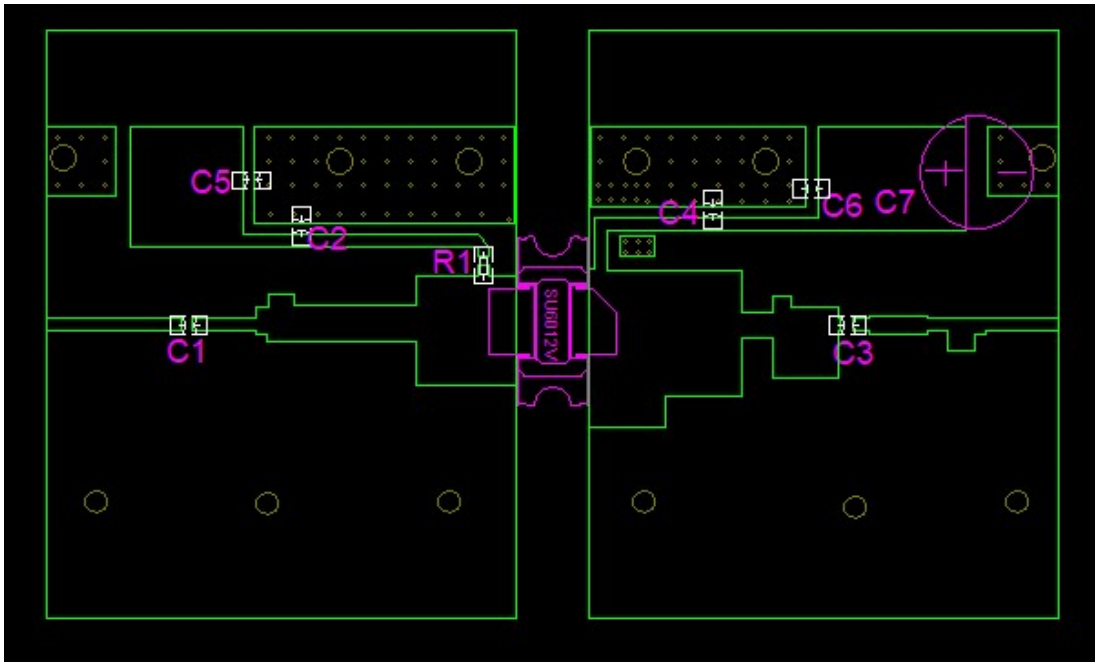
Test Circuit Component Layout (1800-4000MHz)
